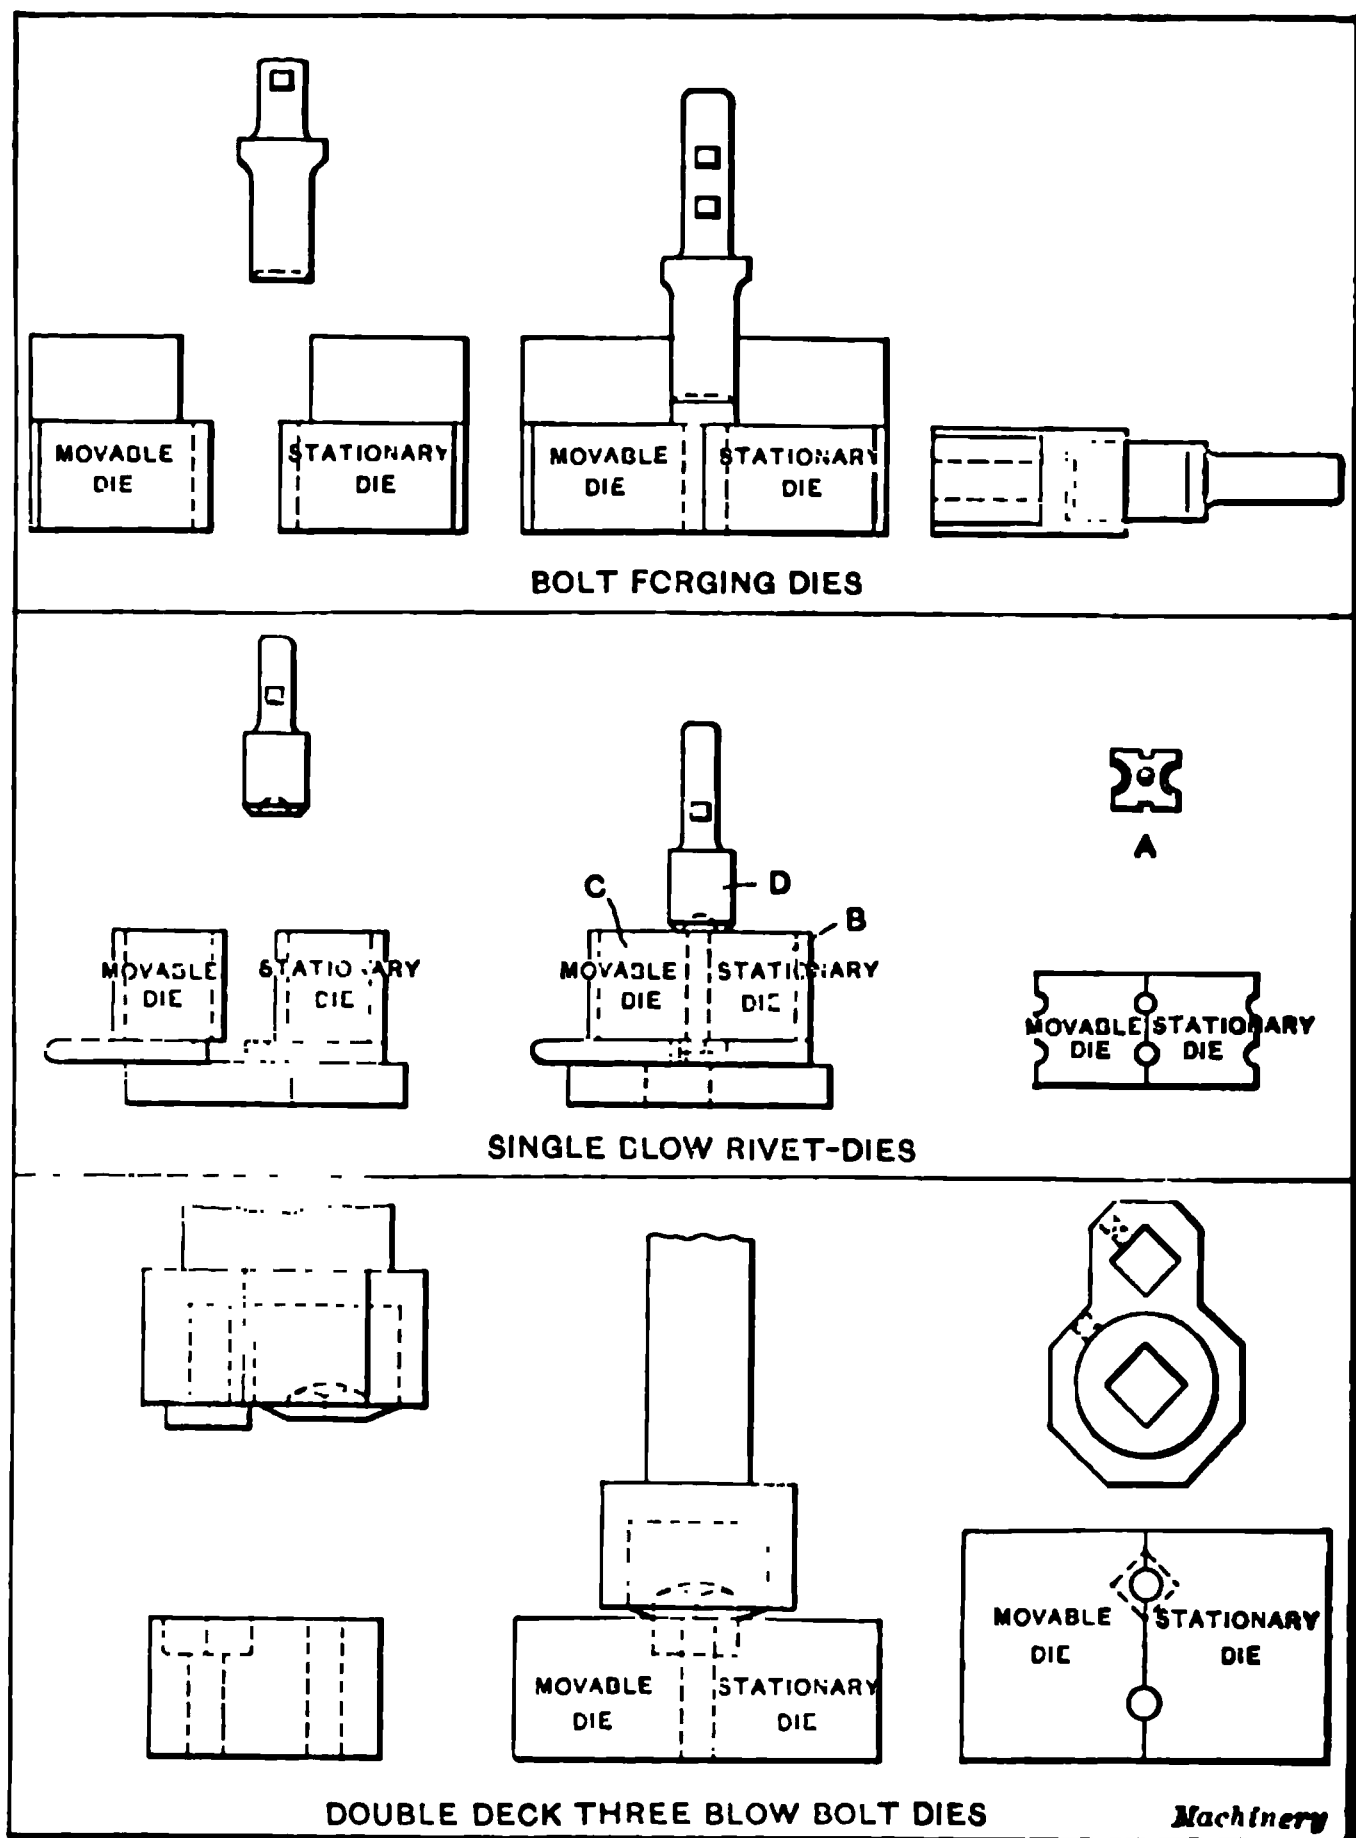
Plain Type of Bolt Forging Dies of Universal Application.
